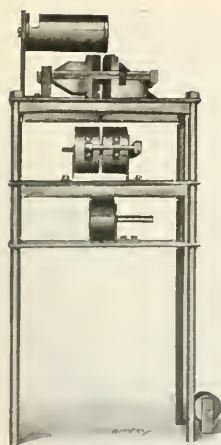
Arrangement of Gearing in Apron which is of Double Plate Type
